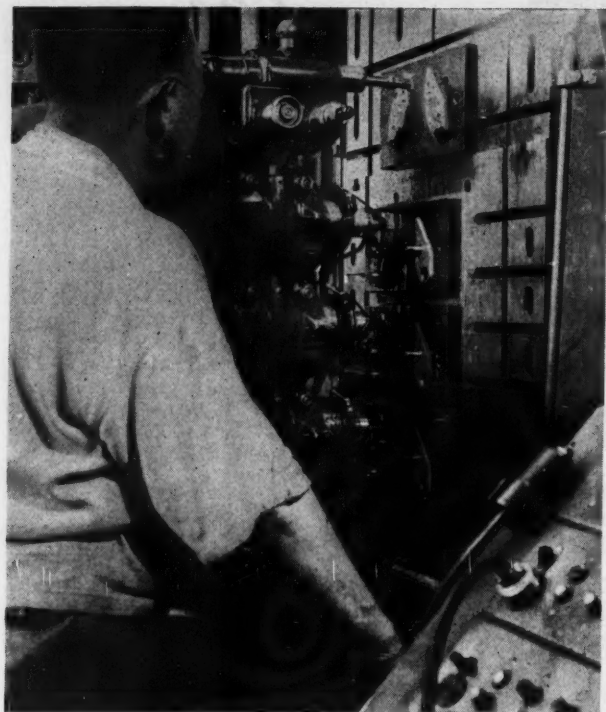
Profiling Extractors in P & W Keller Profiling Machine. Three Pieces are Finished Simultaneously, the Three Cutters Being Guided by the Stylus
